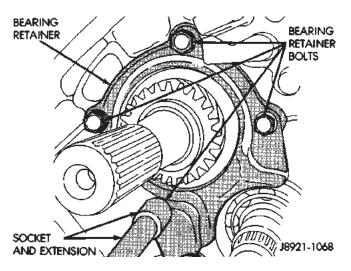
Remove Output Shaft Rear Bearing Retainer
